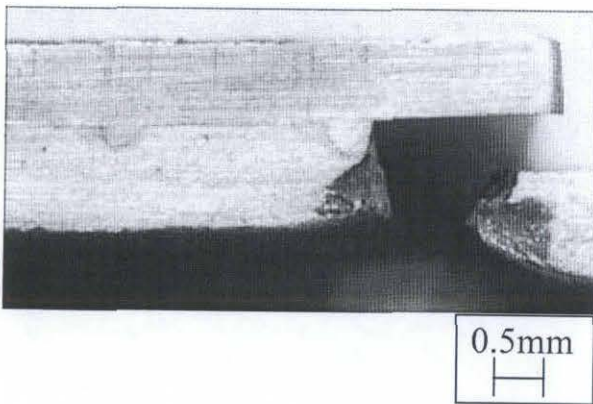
Tensile shear test specimens after testing of SPCC/A1050.
